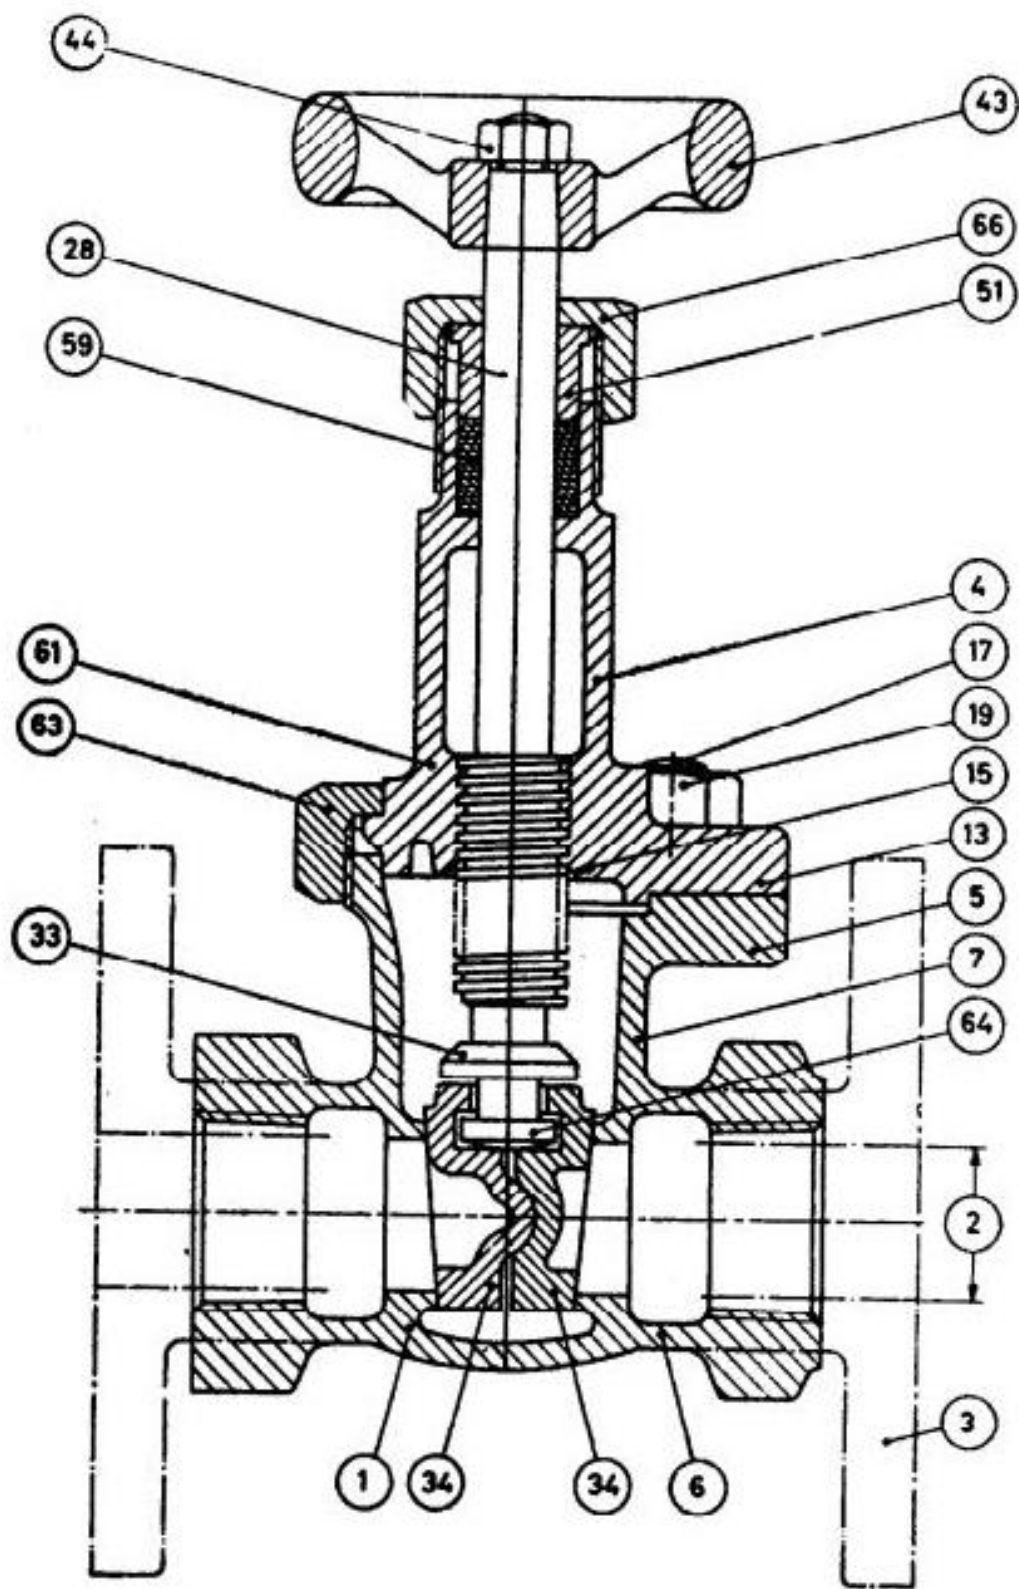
INSIDE SCREW, SPLIT WEDGE, RISING STEM
